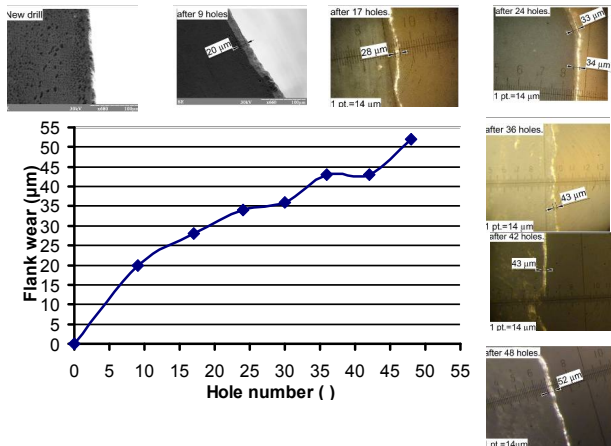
Progress of flank wear during CFRP/steel stack machining
